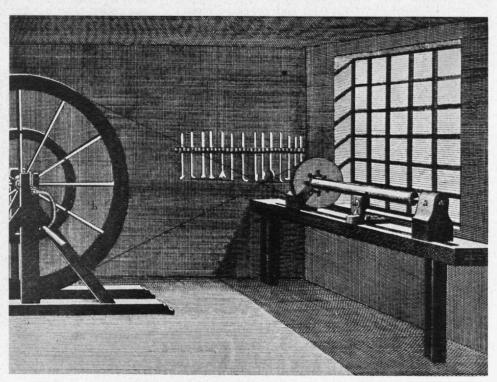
A metal-turning lathe of 1751, driven by a "great wheel"
